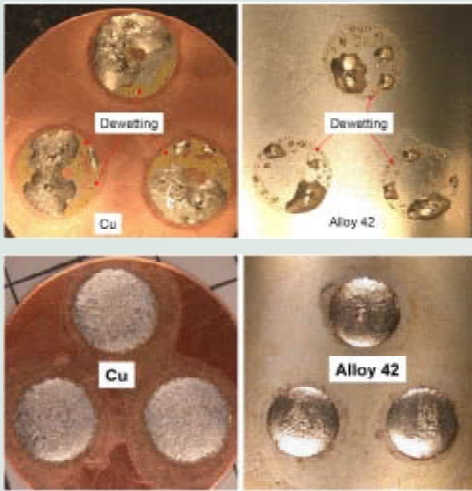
Improved wetting of the mixed solder paste comparing to Bi11Ag paste on Cu and Alloy 42 coupons.
